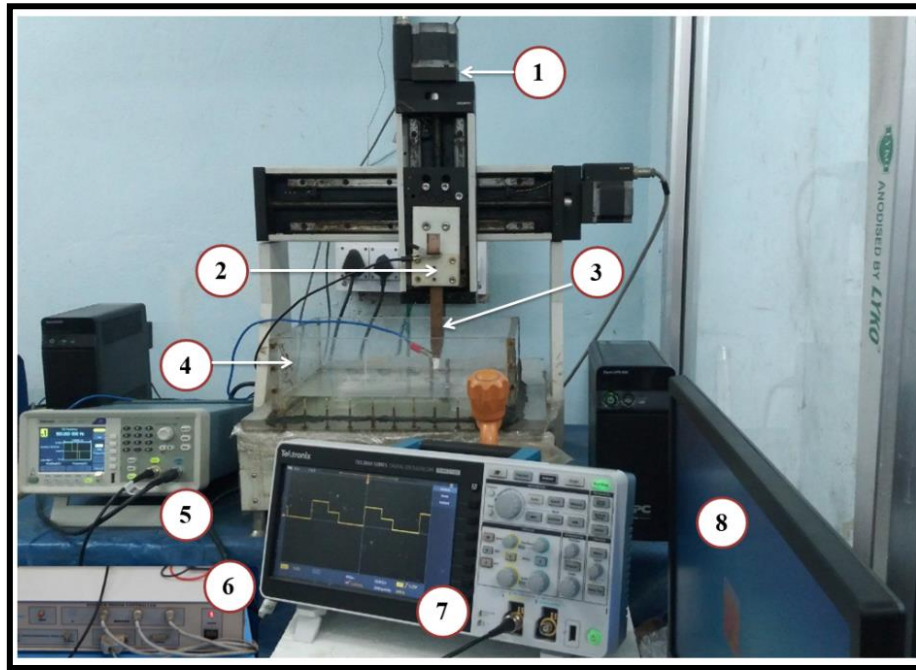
Actual photograph of developed EMM setup consist with: Gantry x-y-z stage (1), Microtool holder fixture with z axis (2), Microtool holder (3), Machining chamber (4), Function generator (5), Stepper motors controller unit (6), Digital storage oscilloscope, and (7), Desktop computer (8)
